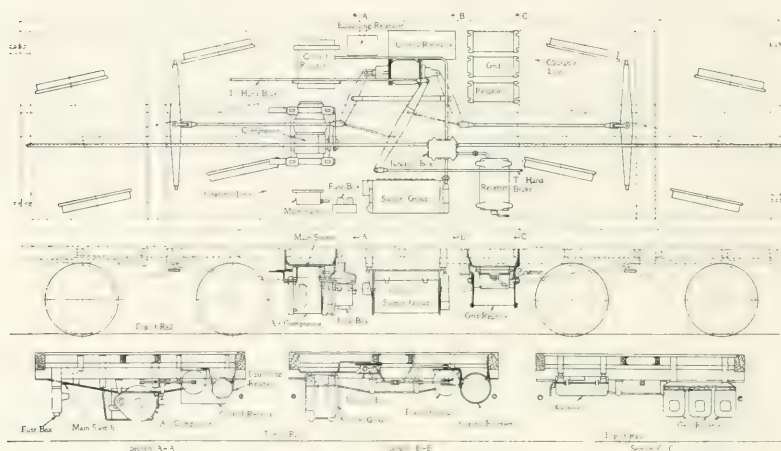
CAR LAYOUT SHOWING ARRANGEMENT OF APPARATUS FOR A QUADRUPLE 75 HP EQUIPMENT
